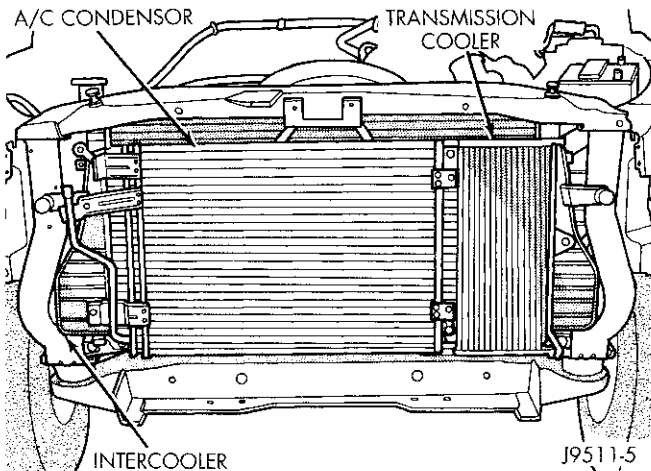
Condenser and Charge Air Cooler—Intercooler
